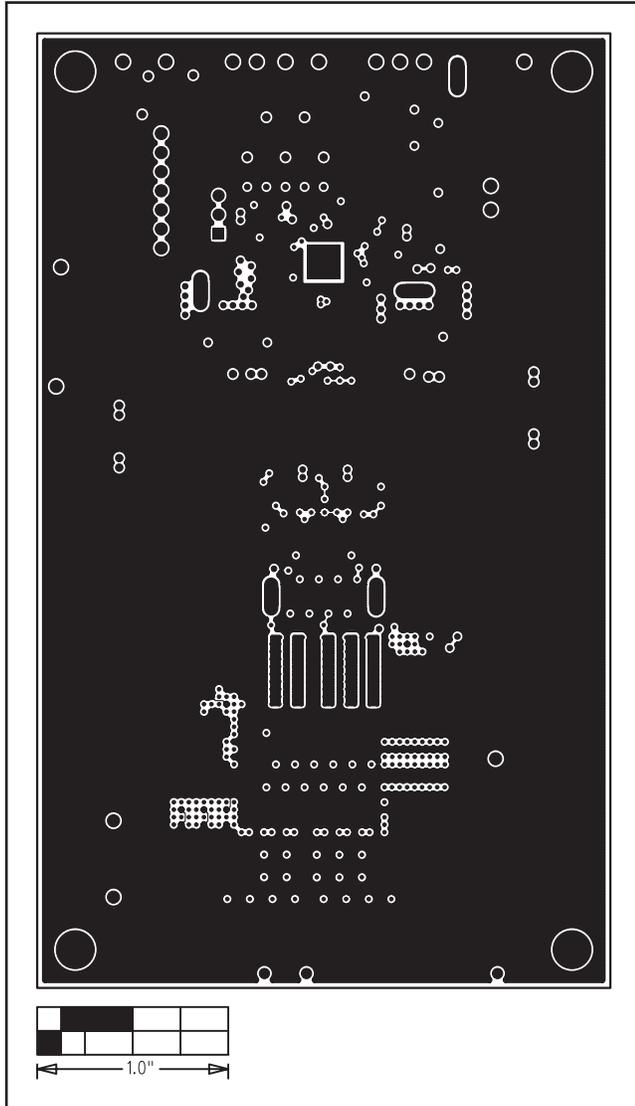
MAX17582 EV Kit PCB Layout—Internal Layer 4 (PGND Layer)
